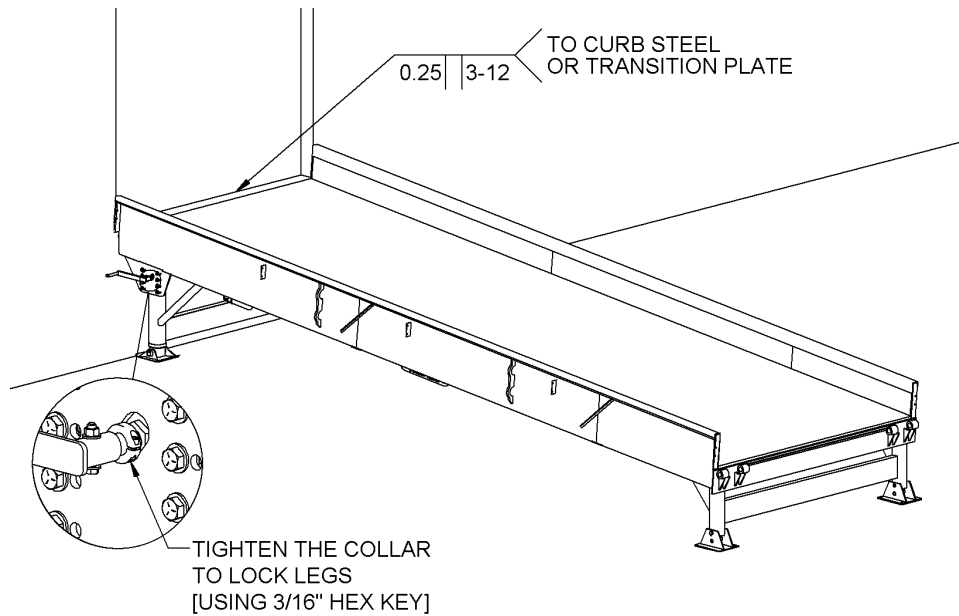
Welding and Locking Legs on Upper Ramp
